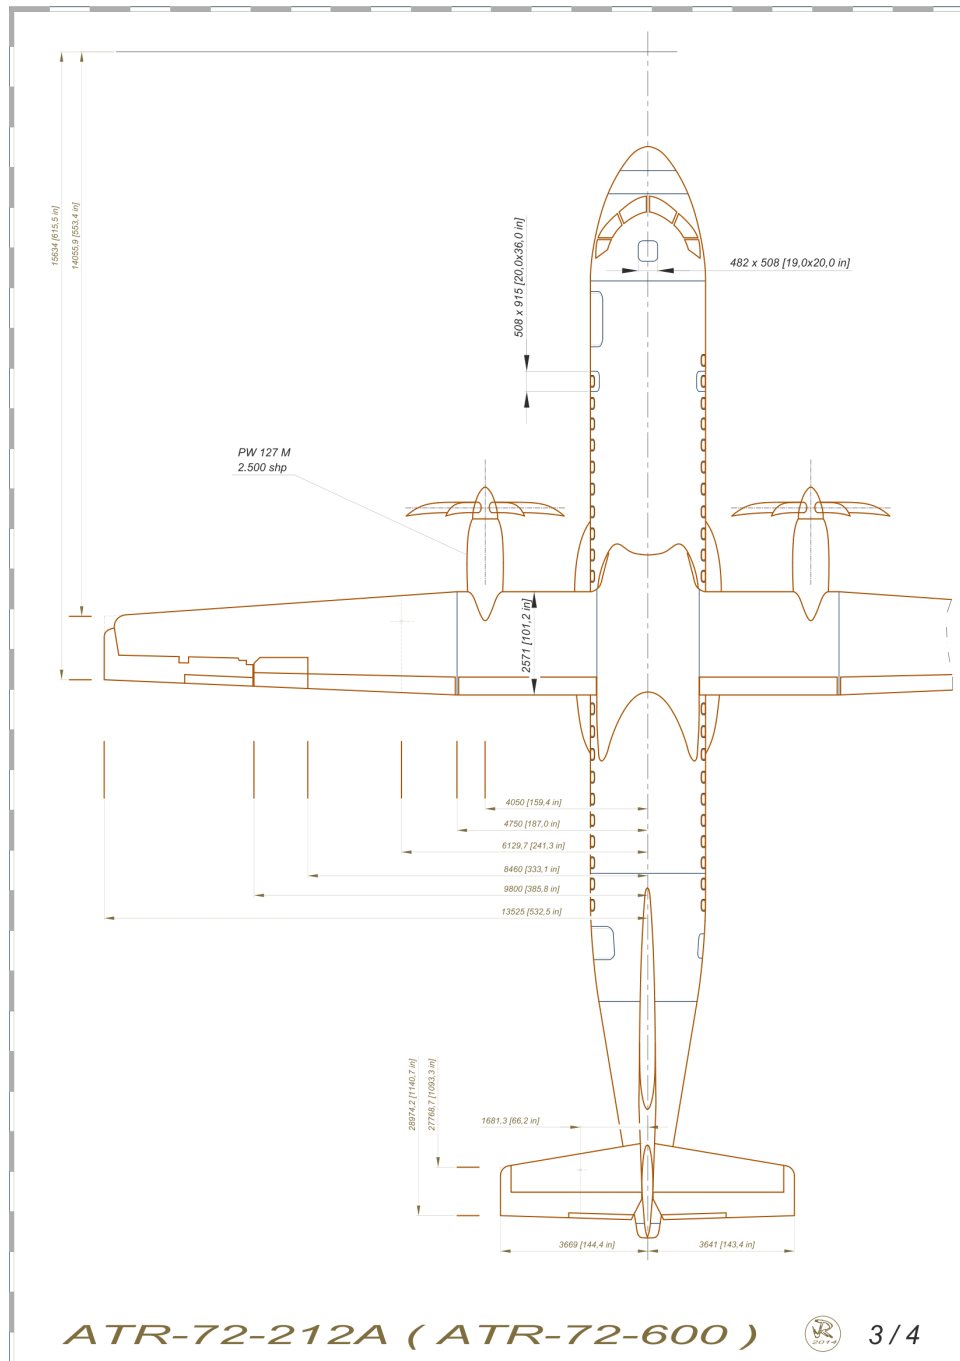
Top view engineering drawing of ATR72-600. Image taken from [3].
